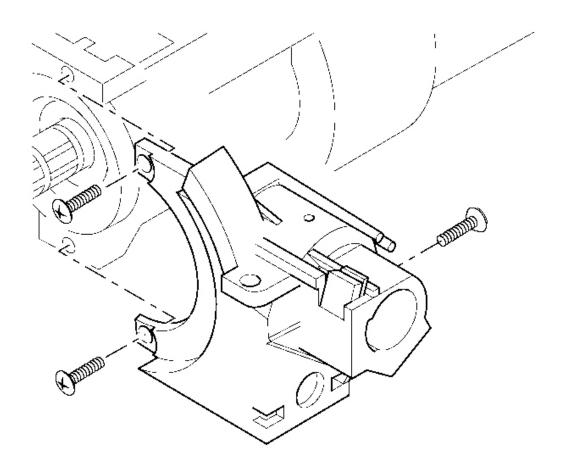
View Of Lock Cylinder Housing TORX Screws Courtesy of GENERAL MOTORS CORP.
